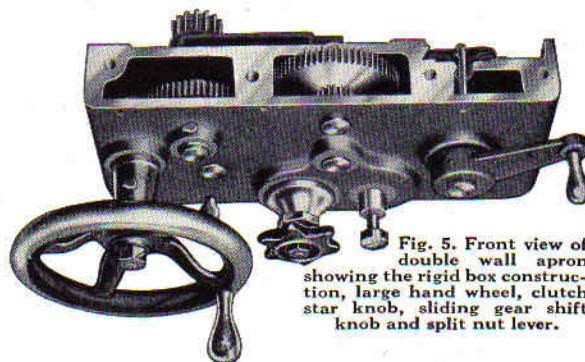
Front view of double wall apron showing the rigid box construction, large hand wheel, clutch star knob, sliding gear shift knob and split nut lever.
